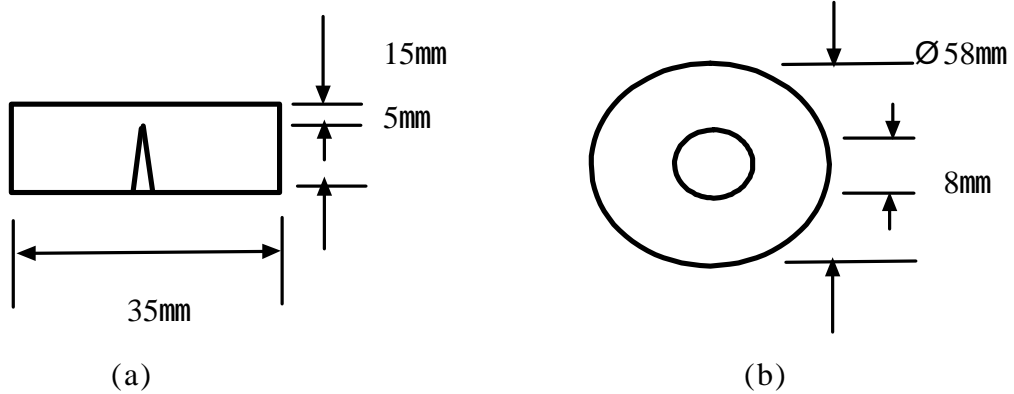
Drawing of specimens for (a) cross-sectional investigation of deposit and (b) friction test.
